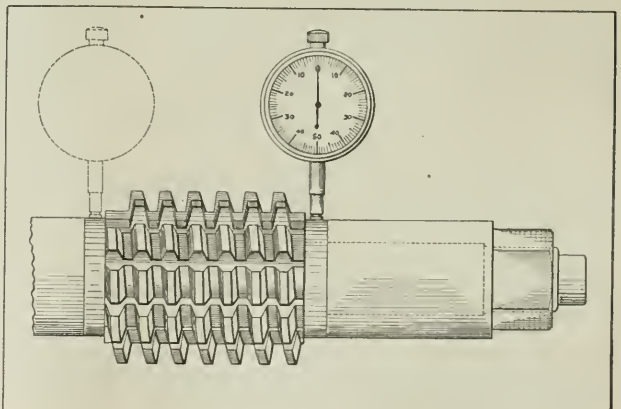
Testing Accuracy of the Hob Arbor after tightening the Nut
